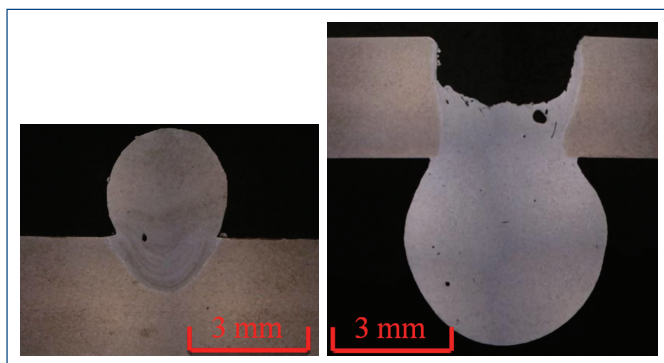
Bead on plate welds in active gas, Left – I= 100 A, Right – I= 120 A
